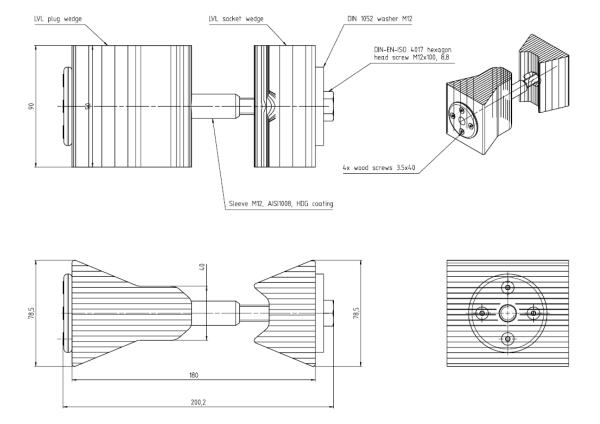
Basic geometry and components of the Hilti Panel Connector; all dimensions are given in mm
